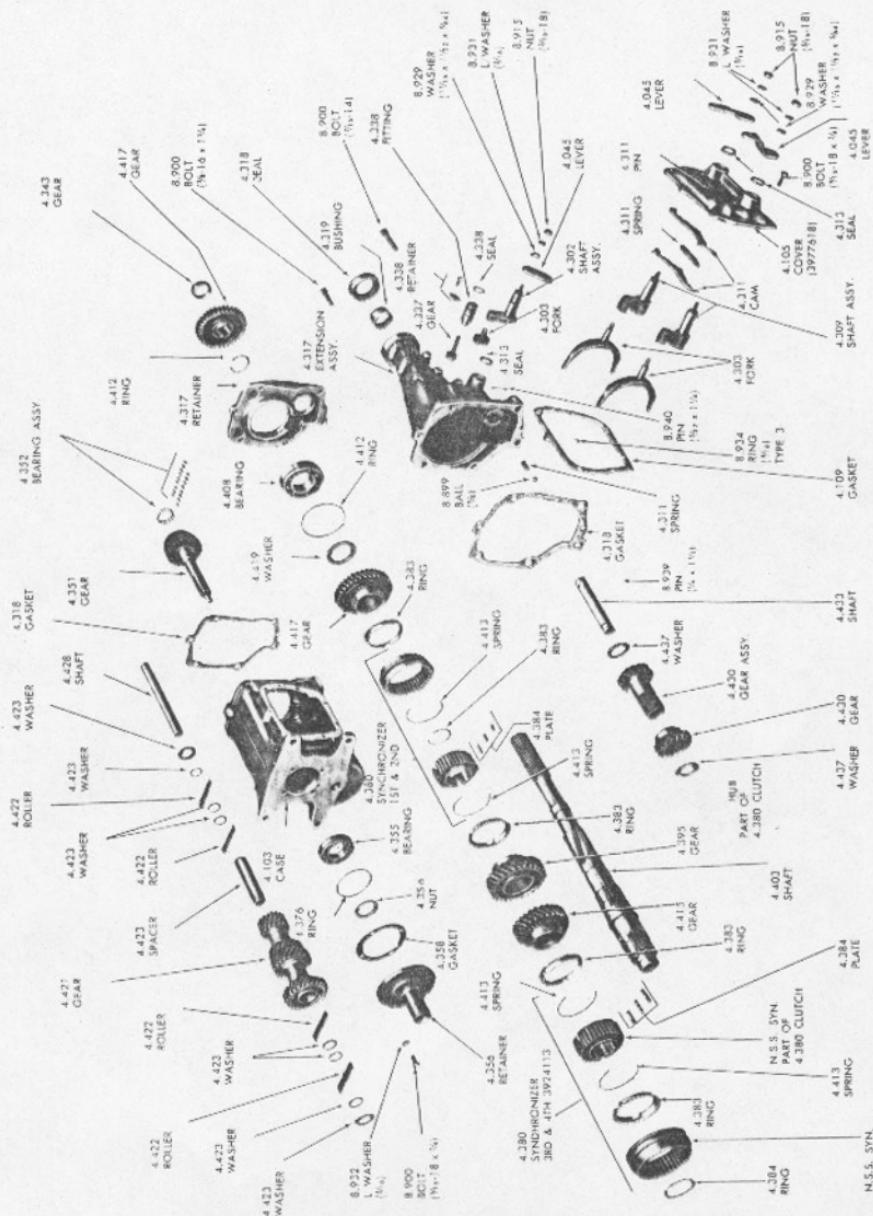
Exploded view of a Muncie Four Speed transmission.
